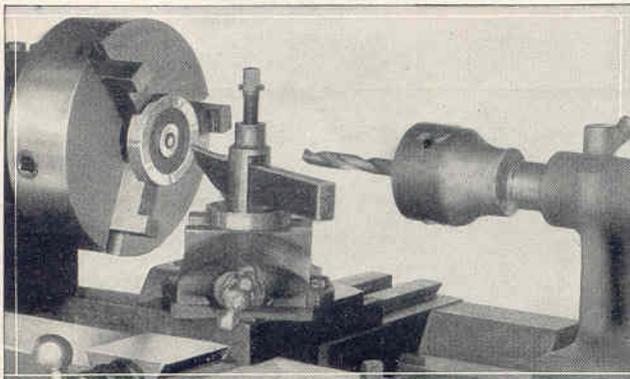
Drilling and Facing a Forged Steel Gear Blank.
